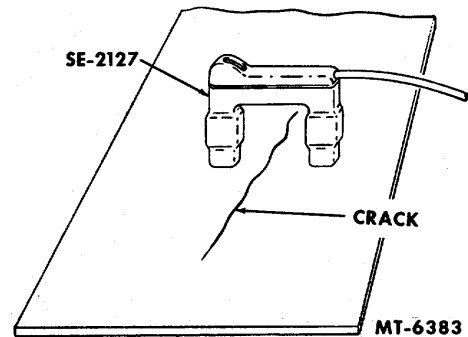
Showing use of SE-2127 Portable White Line Magnetic Inspection Tool. The crack area is dusted with a special white powder which clearly indicates the crack length when the magnetic field across the crack is generated.
